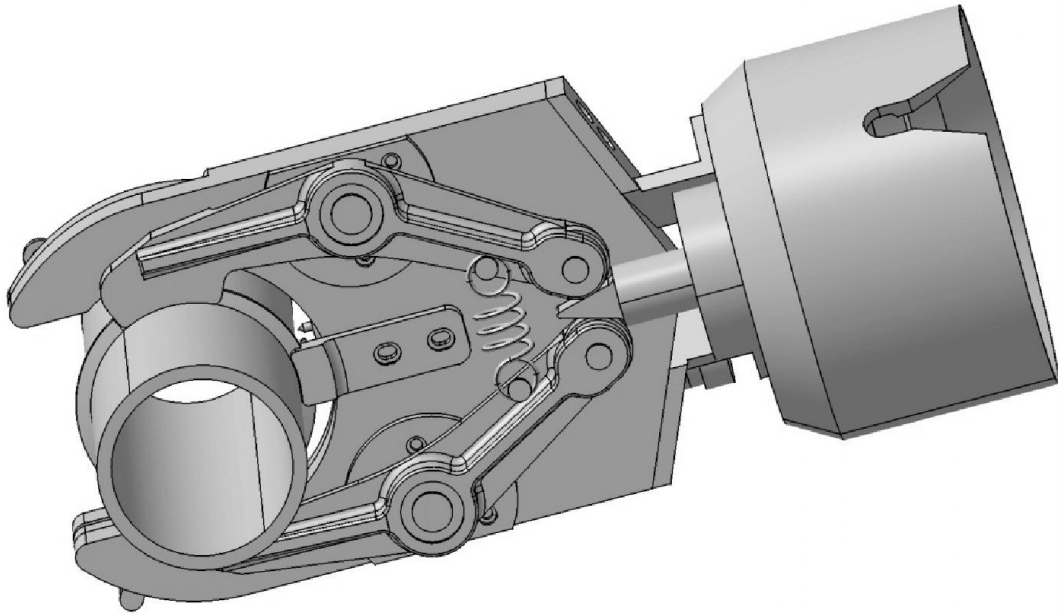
Cooperative Pipe Maintenance Scheme orbital welding tool
